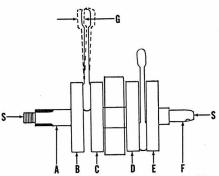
Refer to text for checking crankshaft for correct assembly or wear.
